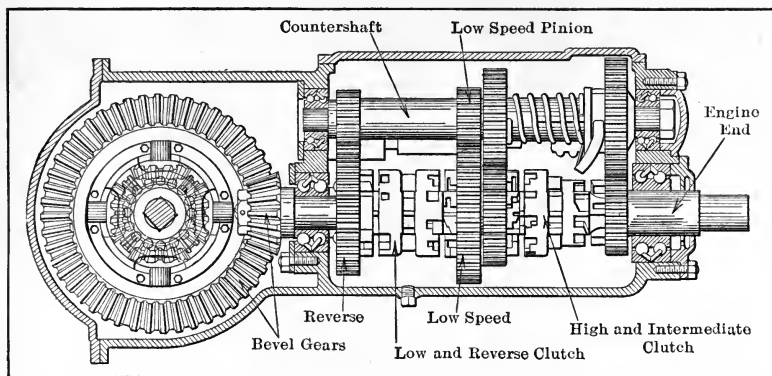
Part Sectional View of Cotta Individual Clutch Transmission Designed for Heavy Motor Truck.
